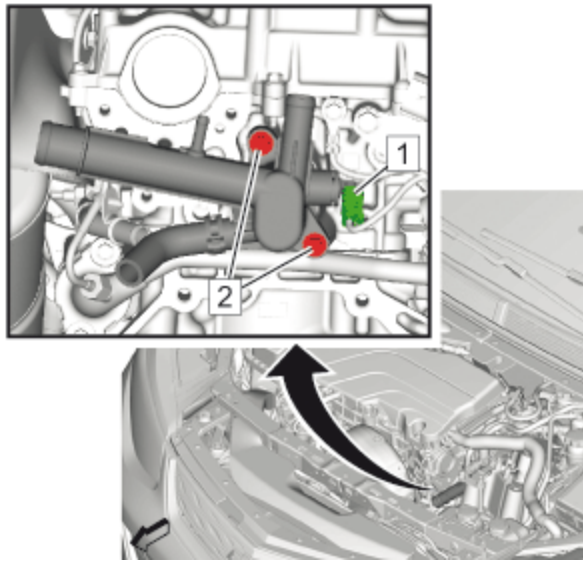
Engine Coolant Temperature Sensor Electrical Connector And Water Outlet Bolts
